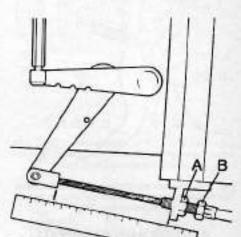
Adjust free play by loosening locknut (A) and turning edjusting sleeve (B) until free play is 3-5 mm (1,8-1,4 inch).
